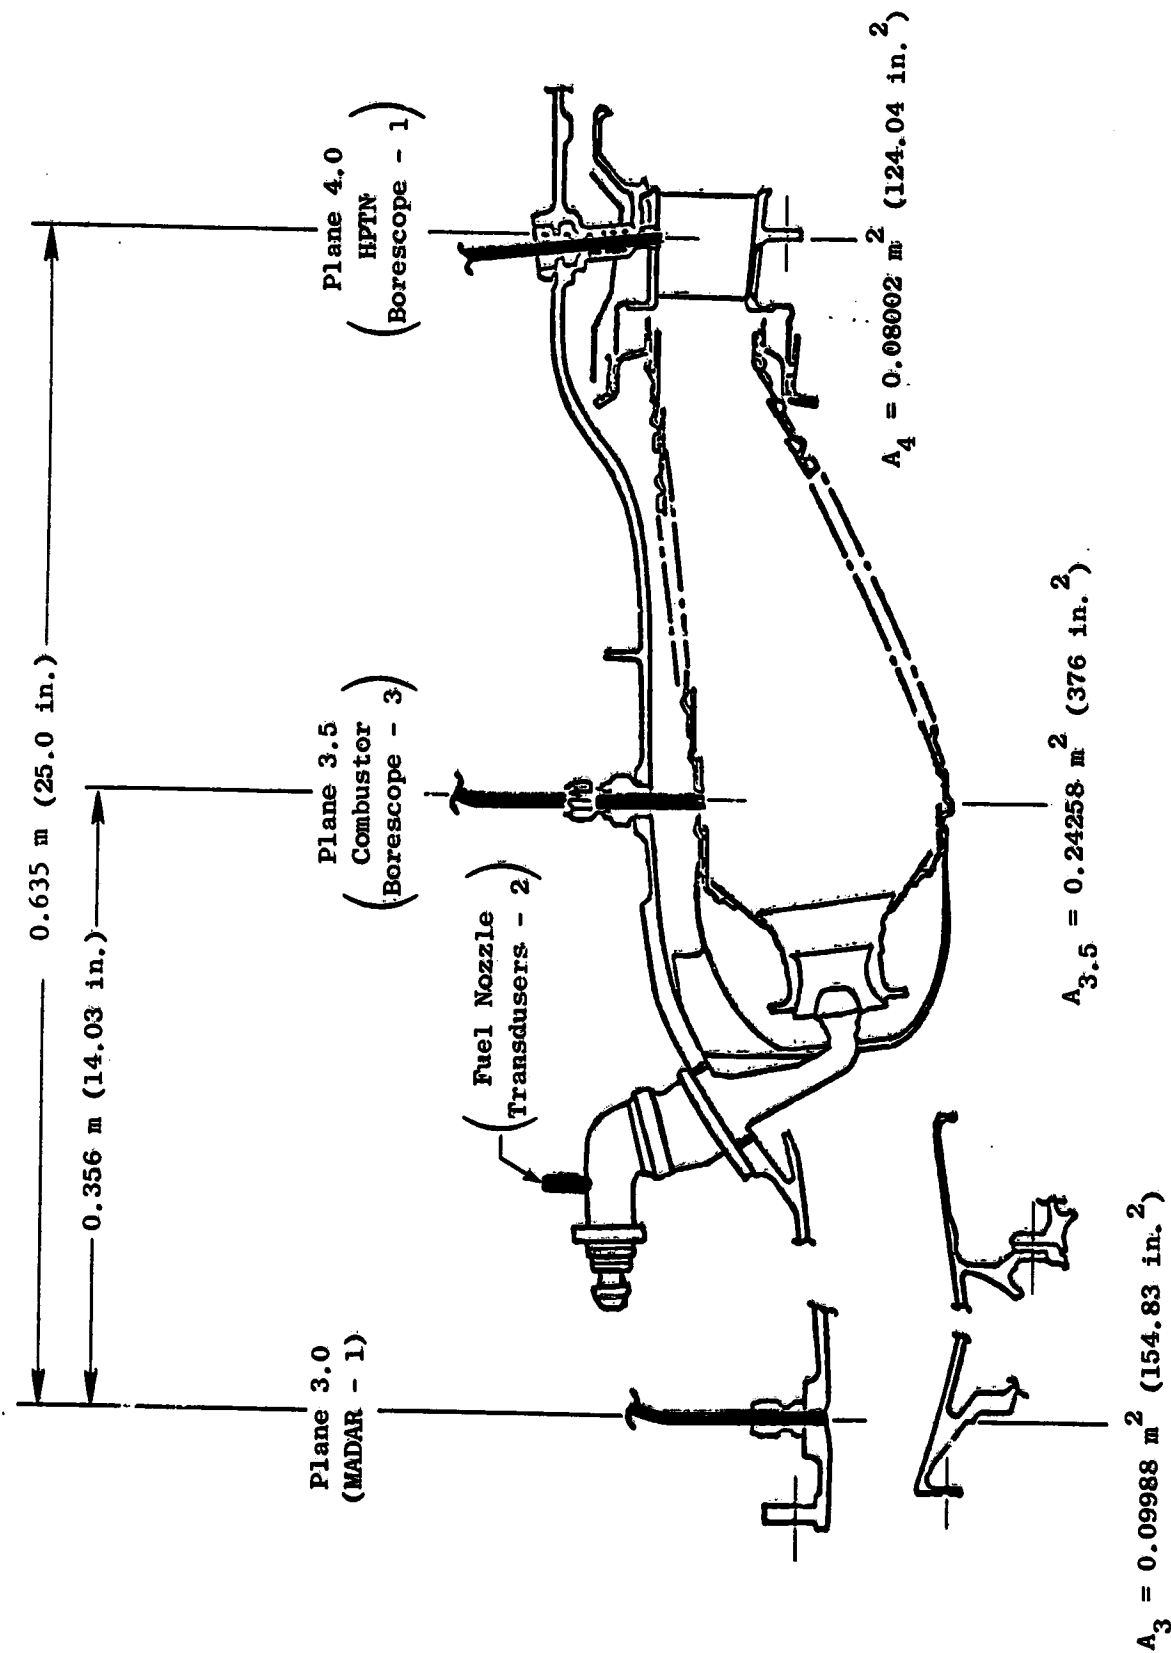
Internal Sensor Locations for Engine Combustor Nozzle Measurements.
